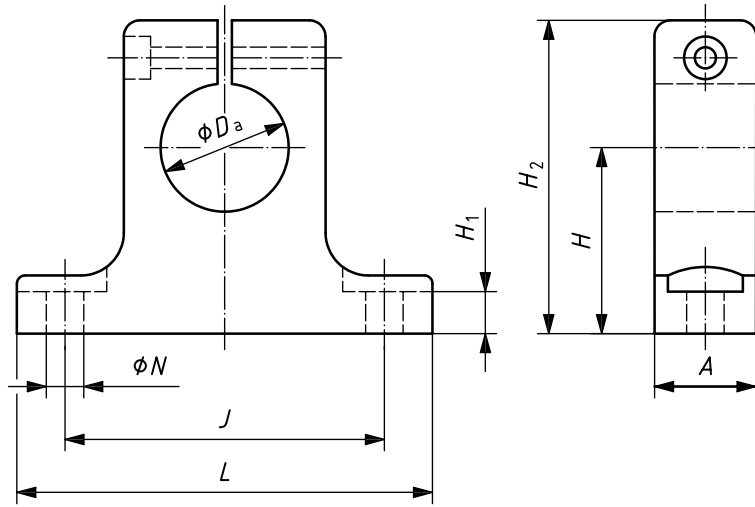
Flanged shaft support blocks for series 1 and 3 sleeve type linear ball bearings
